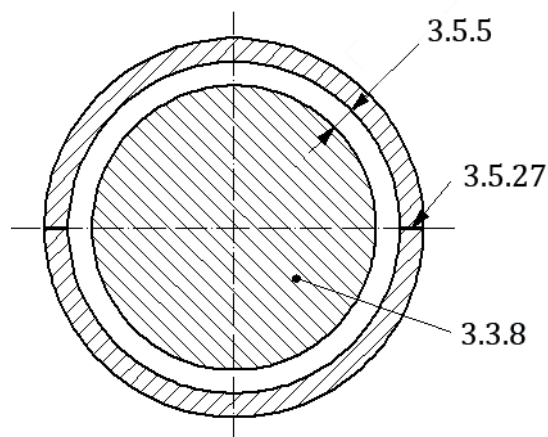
CIRCULAR CYLINDRICAL BEARING
